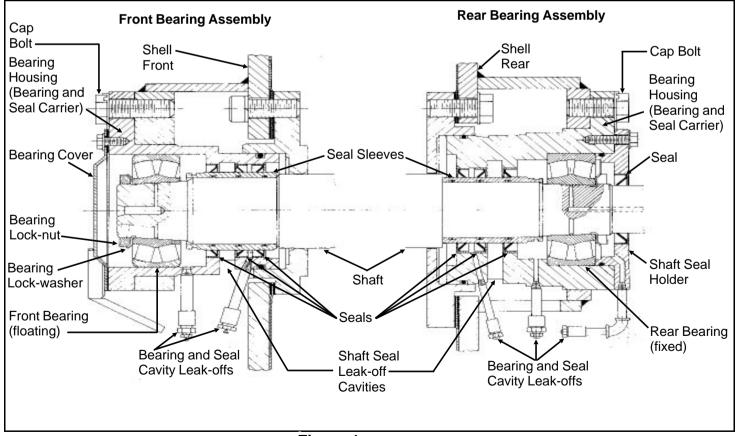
(MSSM0303AE) Cross Section View of Front and Rear Bearing Assemblies (Bearing Assembly for 60" and 72" WED Shown. Others similar.) Access to the bearings and seals for lubrication is provided by the various grease passages. Excess lubricant is excreted through the bearing and seal cavity leak-offs as shown on FIGURE 1. The bearings and seals must be lubricated regularly and the leak-off cavities flushed out periodically through the plugged cleanout connections, in strict accordance with the preventive maintenance procedures elsewhere.
